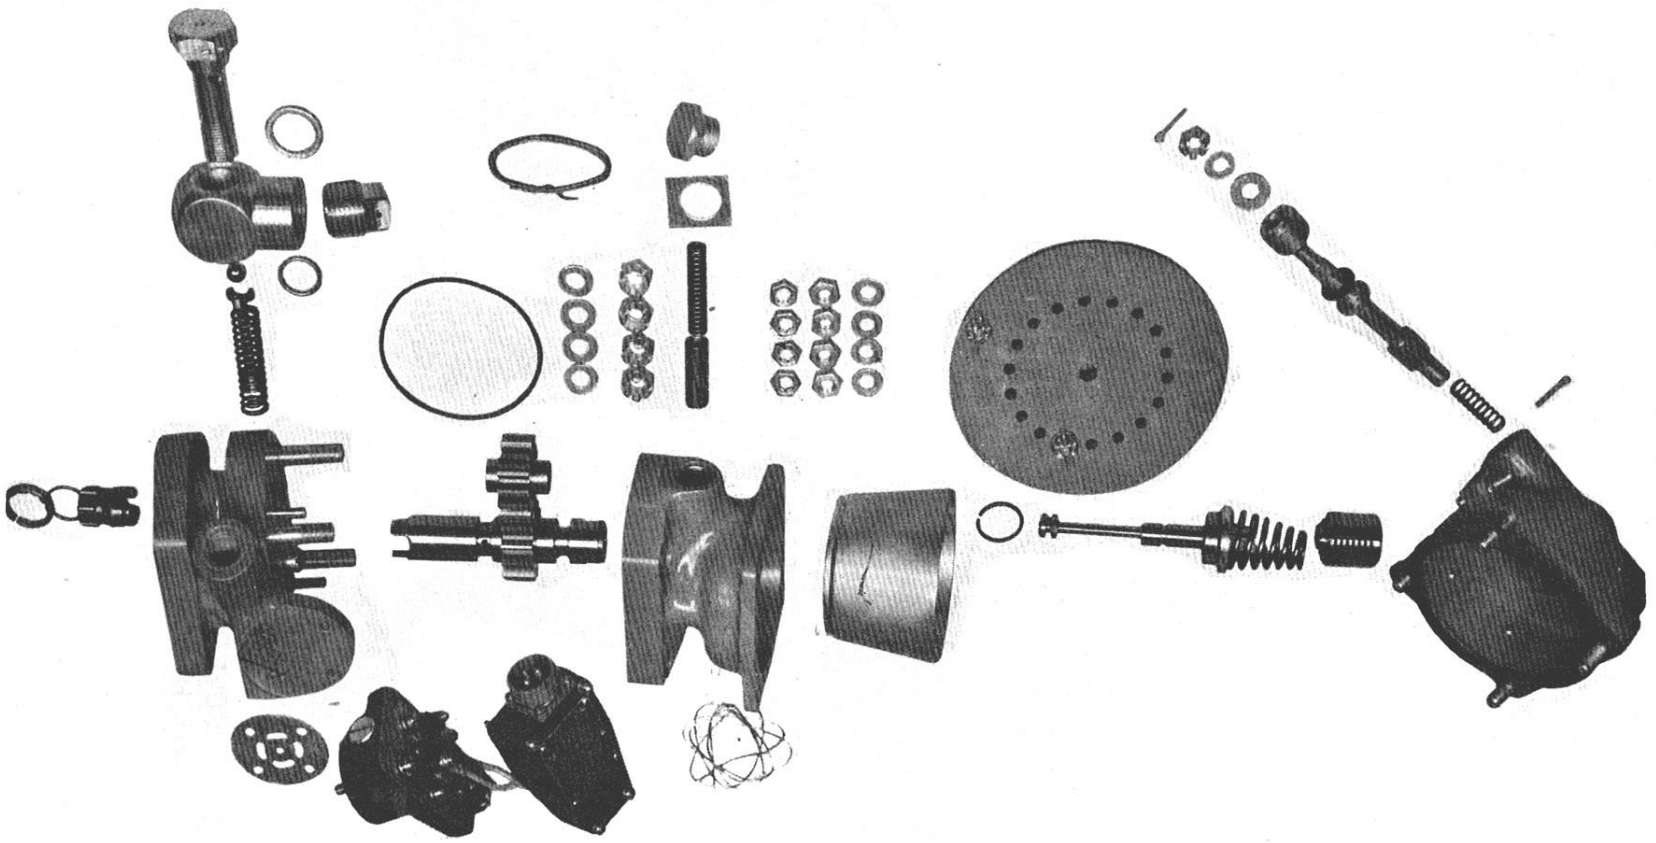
EXPLODED VIEW-GOVERNOR 4KII-SERIES
